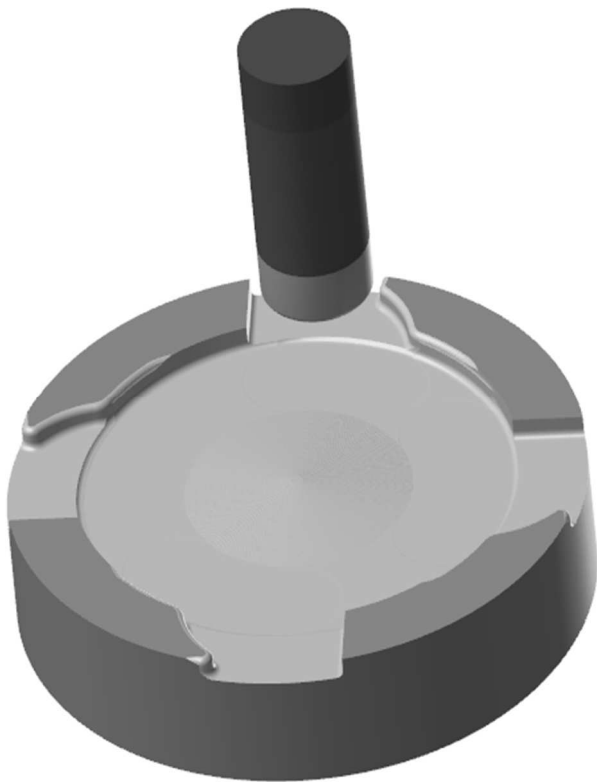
Pictures of Variable Rounding Piston Avoidance Valve Pit Machining
